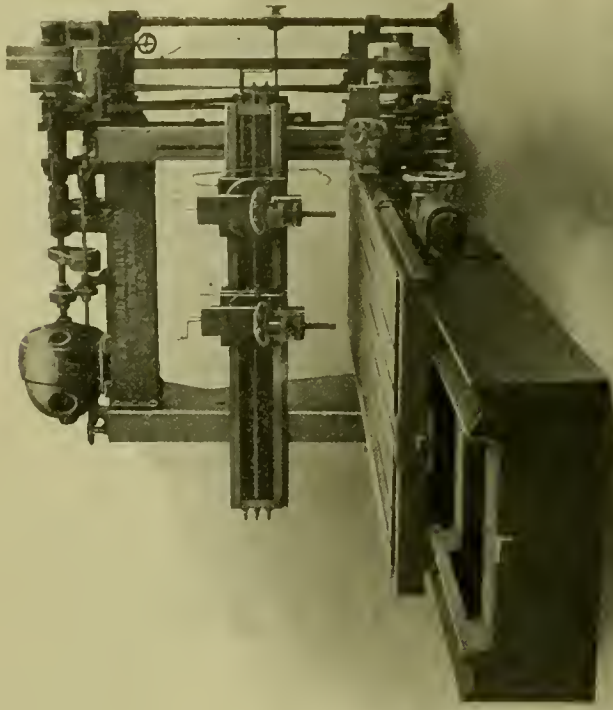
96-IN. BY 24-FT. PLANER.—L. W. POND MACHINE & FOUNDRY COMPANY.
